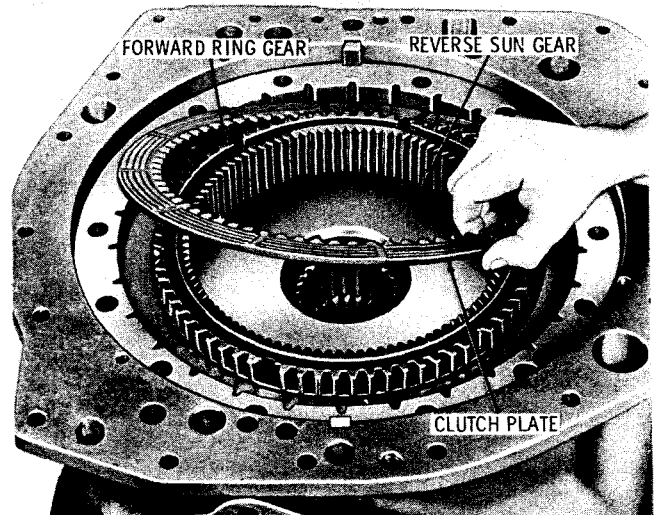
Installing forward clutch plate after installation of ring gear (5630 models)
